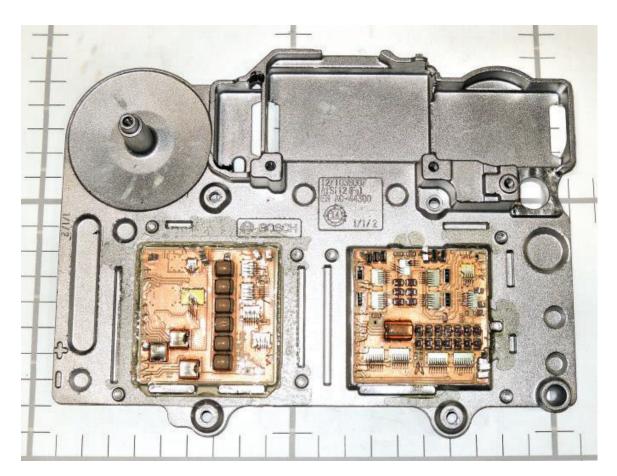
Audi DC/DC Converter: IGBT Assembly Heat Sink with PCBAs still attached
